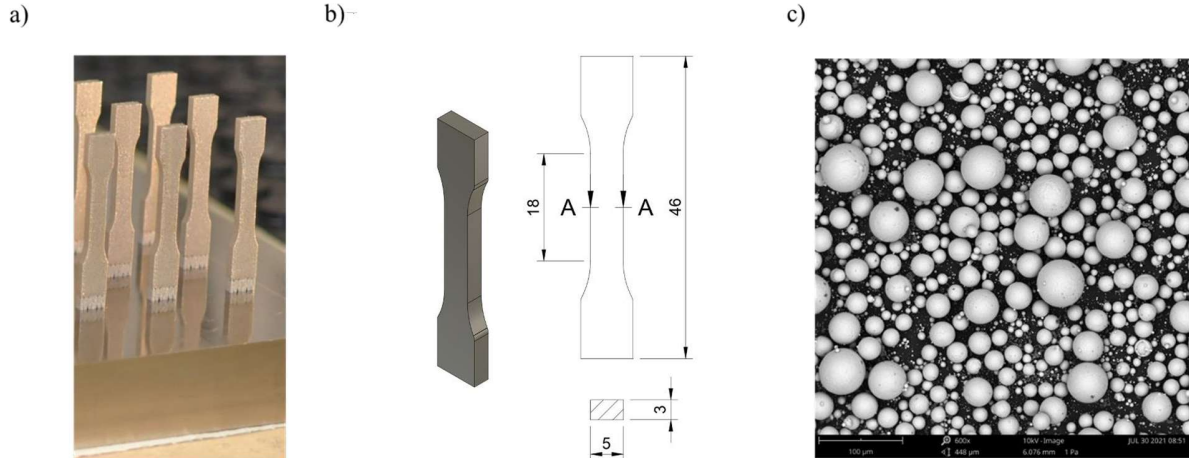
(a) Printed specimens, (b), dog-bone sample dimensions, and (c) micrographic view of Ti-6Al-4V powder used in the experimental campaign.
